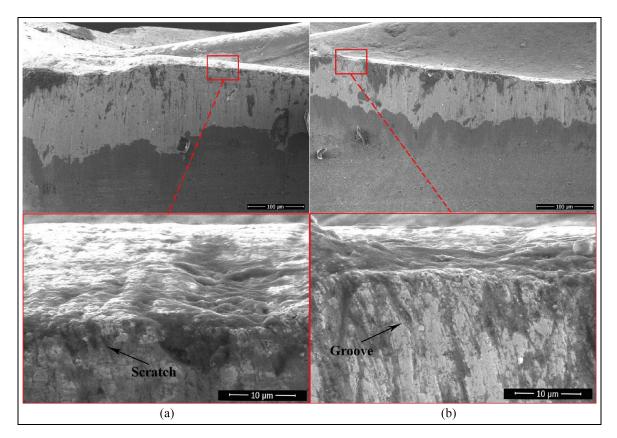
Wear on the flank face of inserts: (a) tool grade TH1000 and AZ91/SiC-2.5%vol with the particle size of 9 μ m and (b) tool grade CP500 and AZ91/SiC-5%vol with the particle size of 45 μ m.
